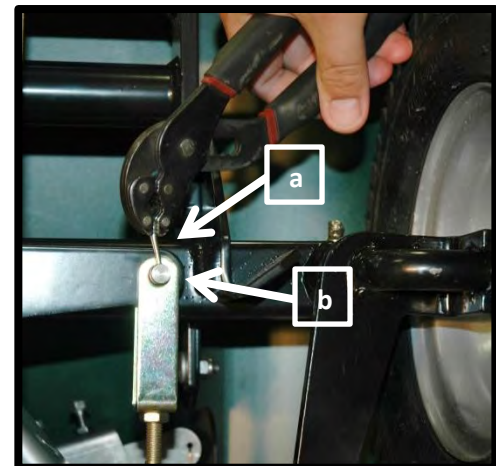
Steering Cable Clevis: a) Cotter Pin b) Clevis Pin
